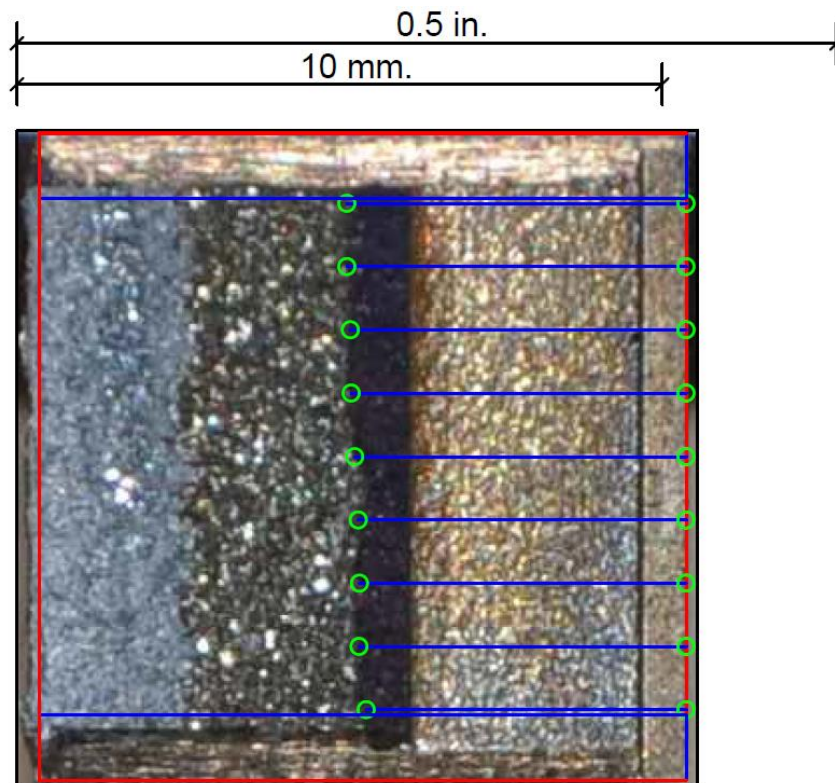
Specimen 4-14' Fracture Surface
